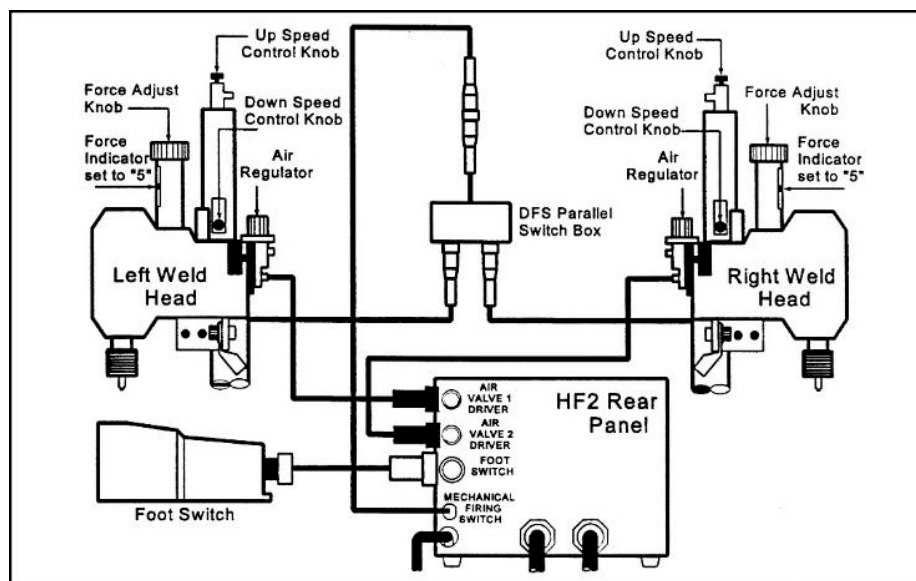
Dual Air Actuated Weld Heads Electrical Connections
